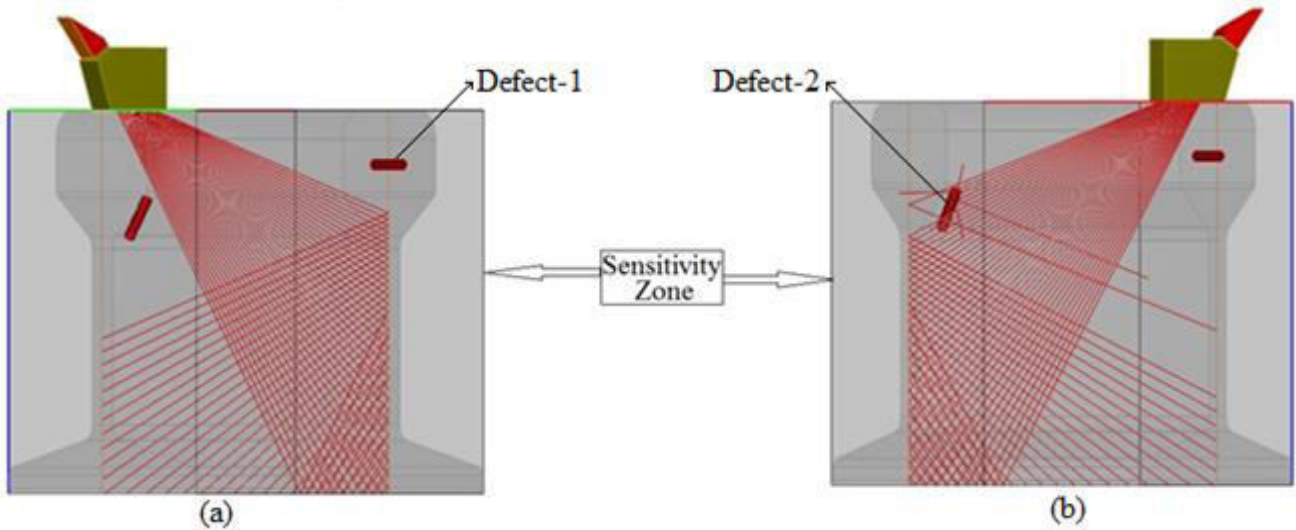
Wedge position for inspecting (a) defect-1 using PA1 (b) defect-2 using PA1
